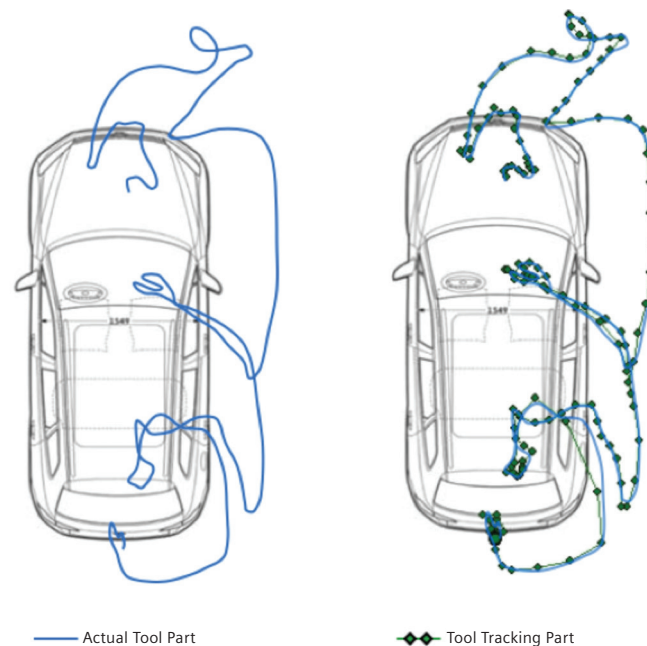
How the Siemens SIMATIC RTLS solution can track a powered, hand-held screwdriver's path during the installation of an auto interior, then analyze the tool's use for possible optimization of this assembly step. Actual Tool Part
